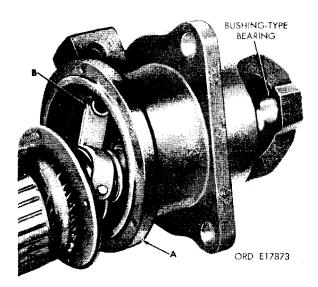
Removing or installing intermediate bearing assembly attaching parts.
